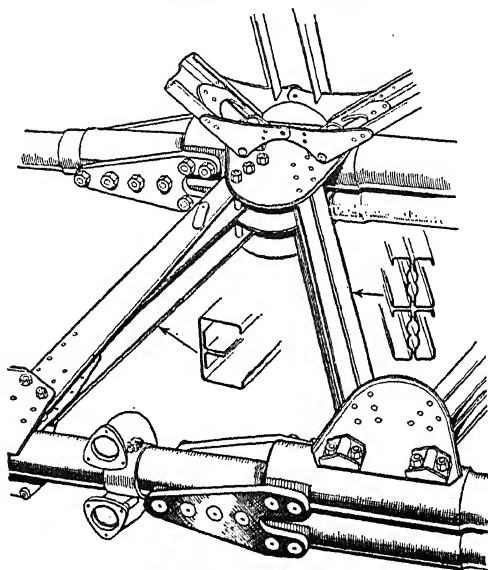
VICKERS "WELLINGTON" SPAR CONSTRUCTION
